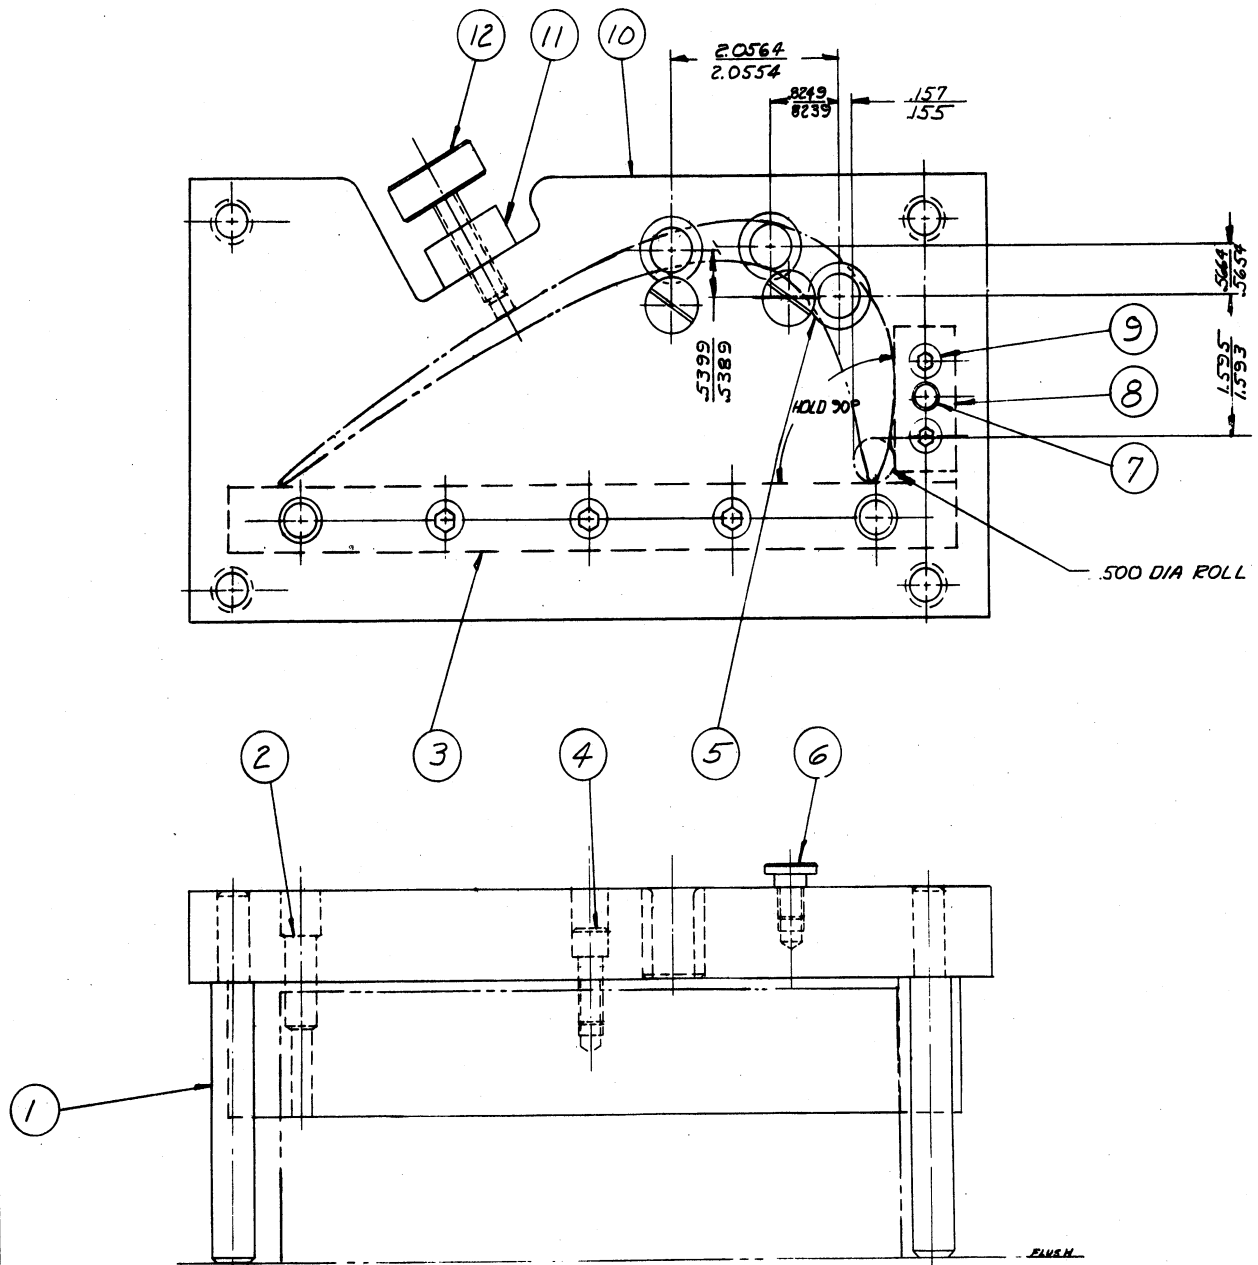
Typical drill jig for positioning mounting holes in test blade.
